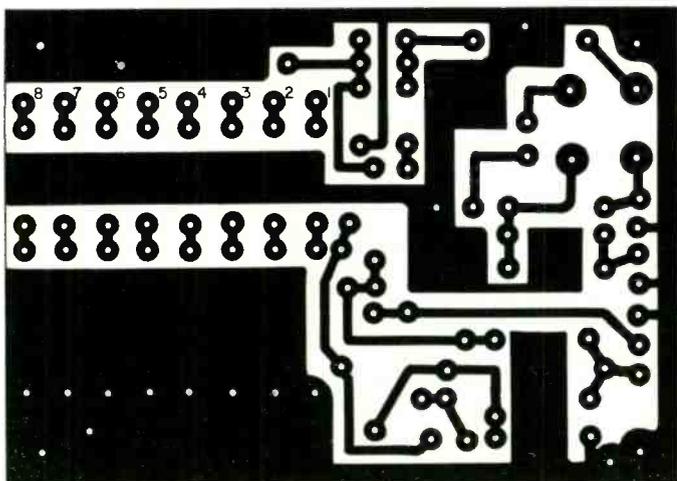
The receiver circuit board reproduced exactly full size (top left). Parts are mounted on top of the board as shown (above). Receiver and relay boards mount together to form the complete receiver.
